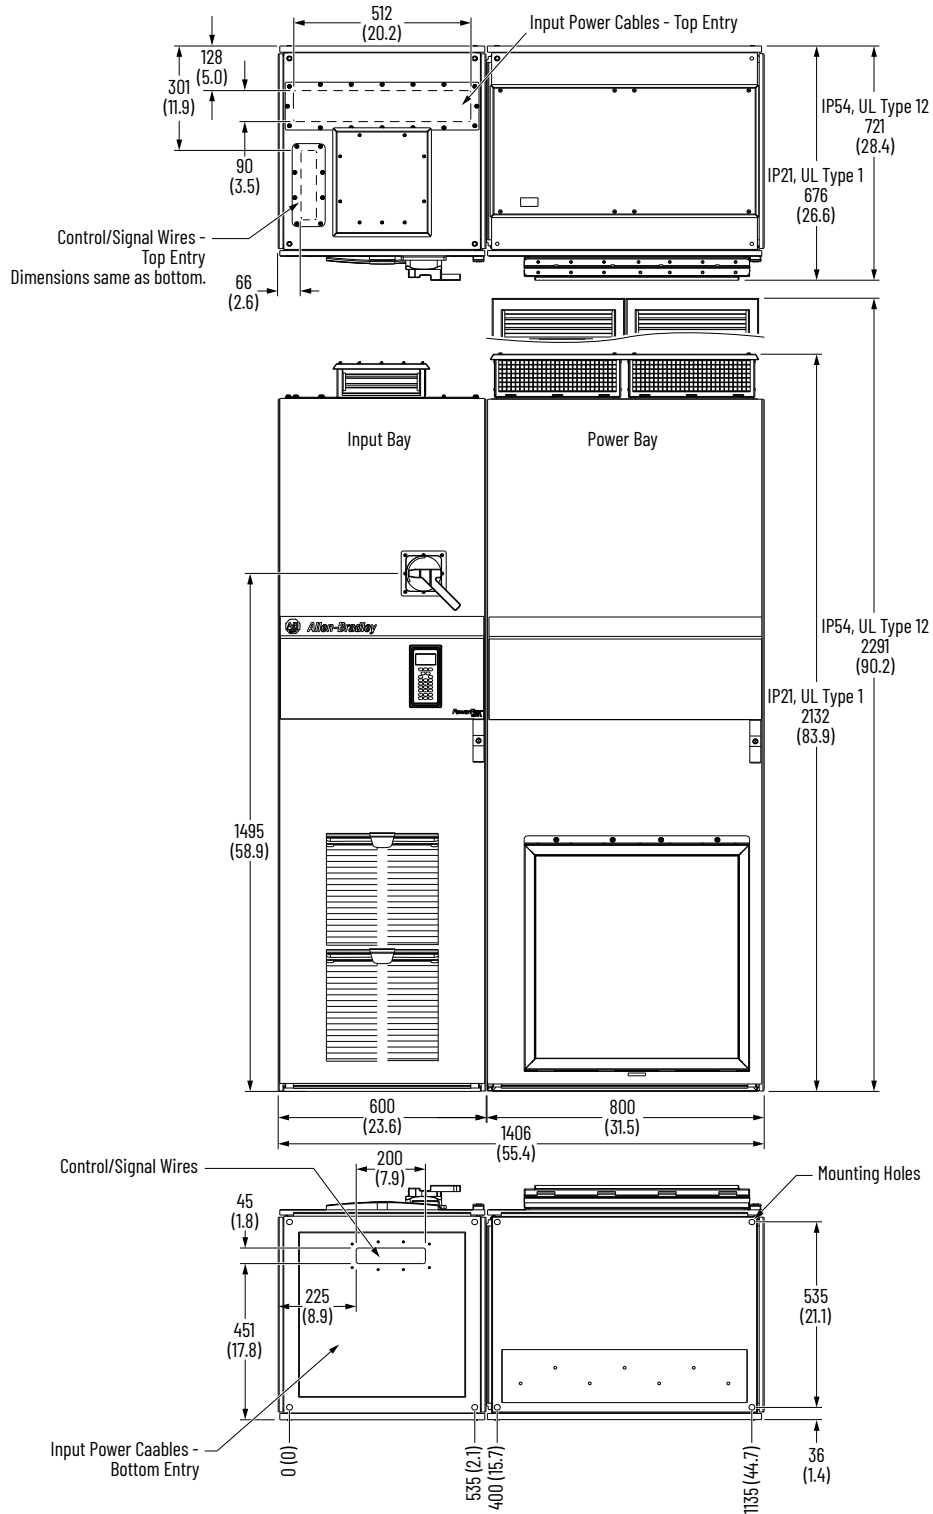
Frame 8 Bus Supplies Top, Front, Bottom, and Side Views—Dimensions are in mm (in.)
